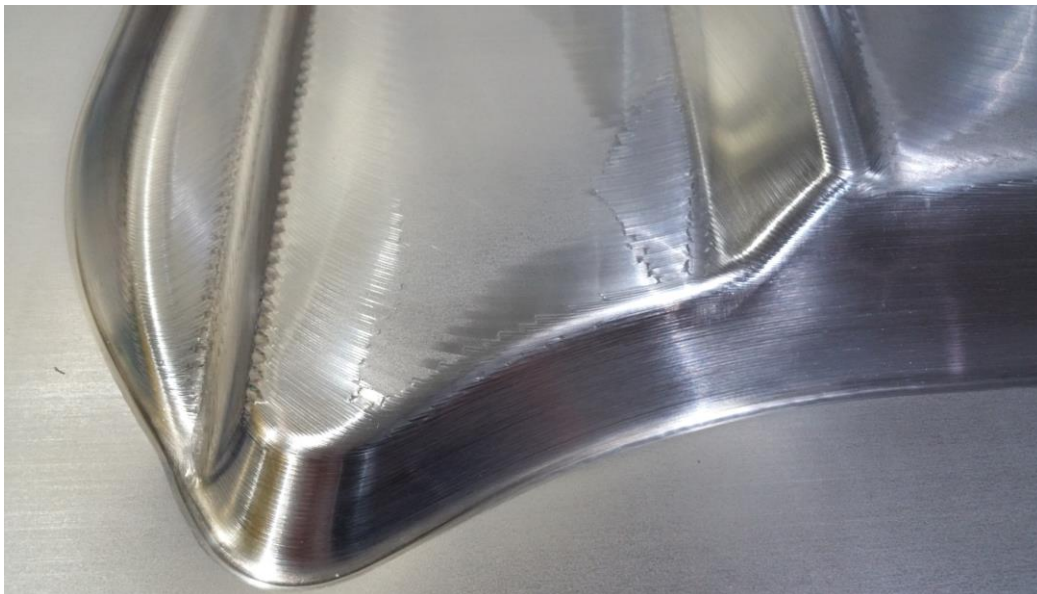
Fill layer tool mark on the corner of the Mustang hood
